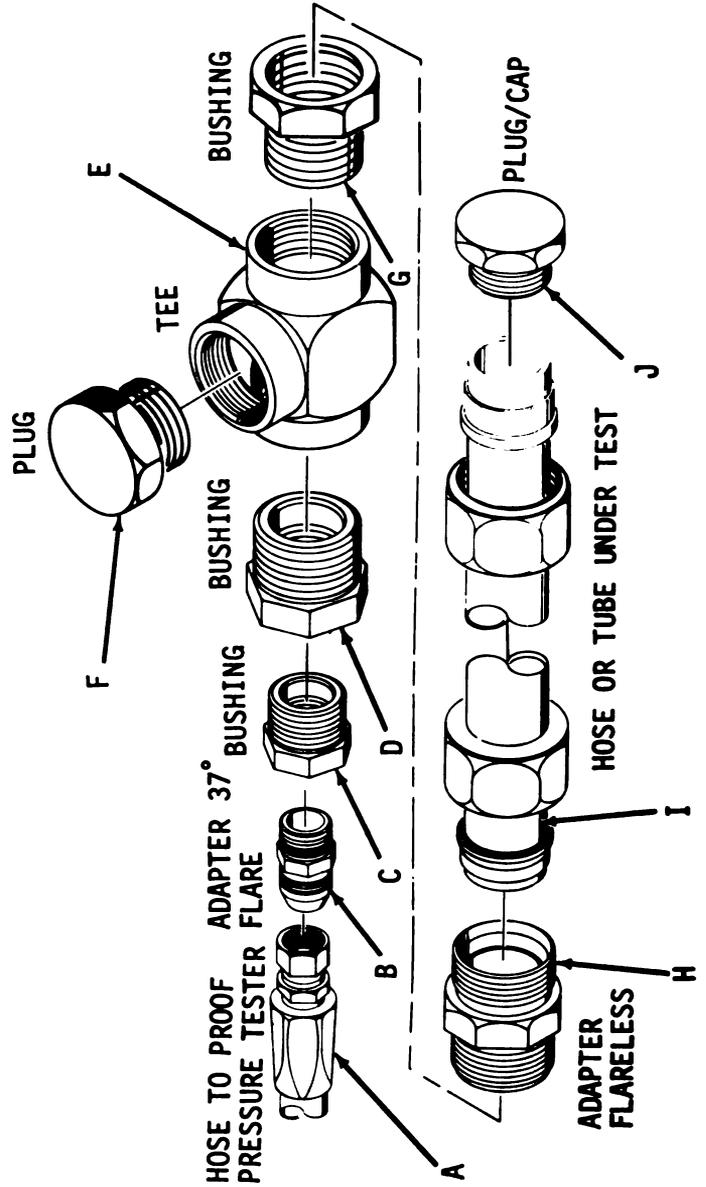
Adapting a Flareless Tube or Hose Assembly to the Proof Pressure Tester.
